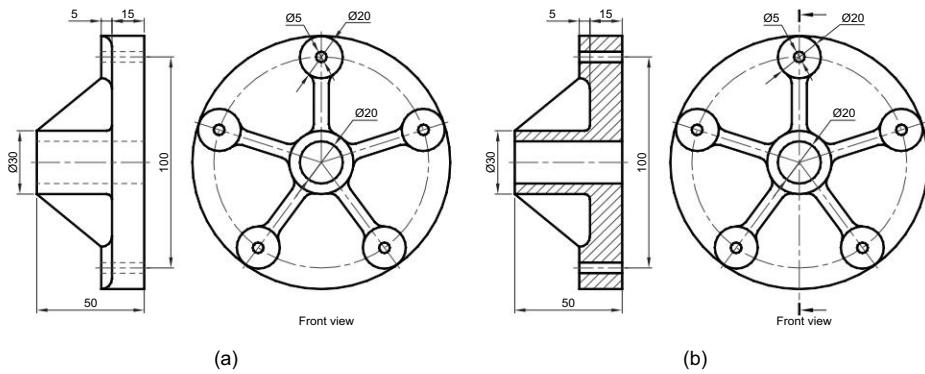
(a) Orthographic views (b) Front view and sectional side view
